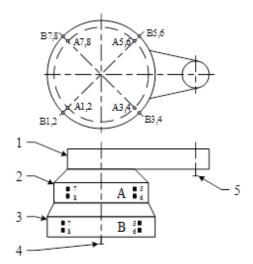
Scheme of the gearbox with position of strain gauges. 1. Three stage helical gearbox with first planetary gearbox, 2. Second planetary gearbox, 3. Third planetary gearbox, 4. Output shaft, 5. Input shaft.
